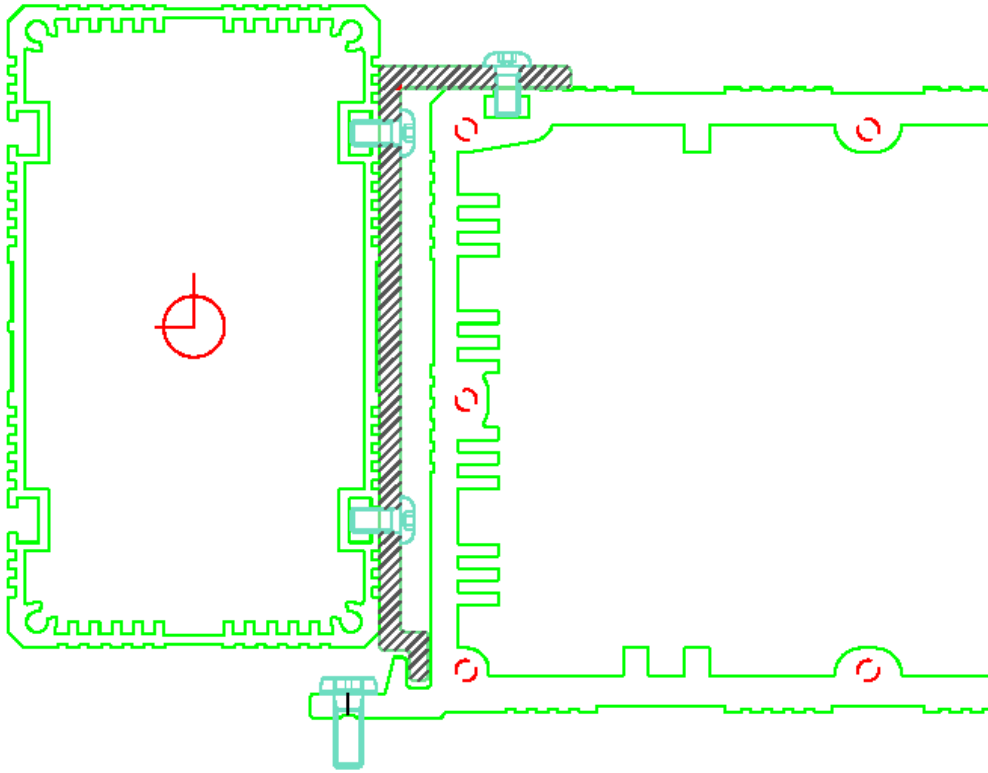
Detail of the L-bracket mounting scheme for attaching the radio and micro-TPCB boxes.
